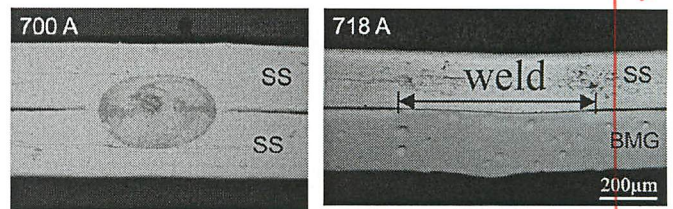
Comparison between SUS304 similar joint (a), and SUS304/BMG dissimilar joint (b), welded with the similar welding condition
